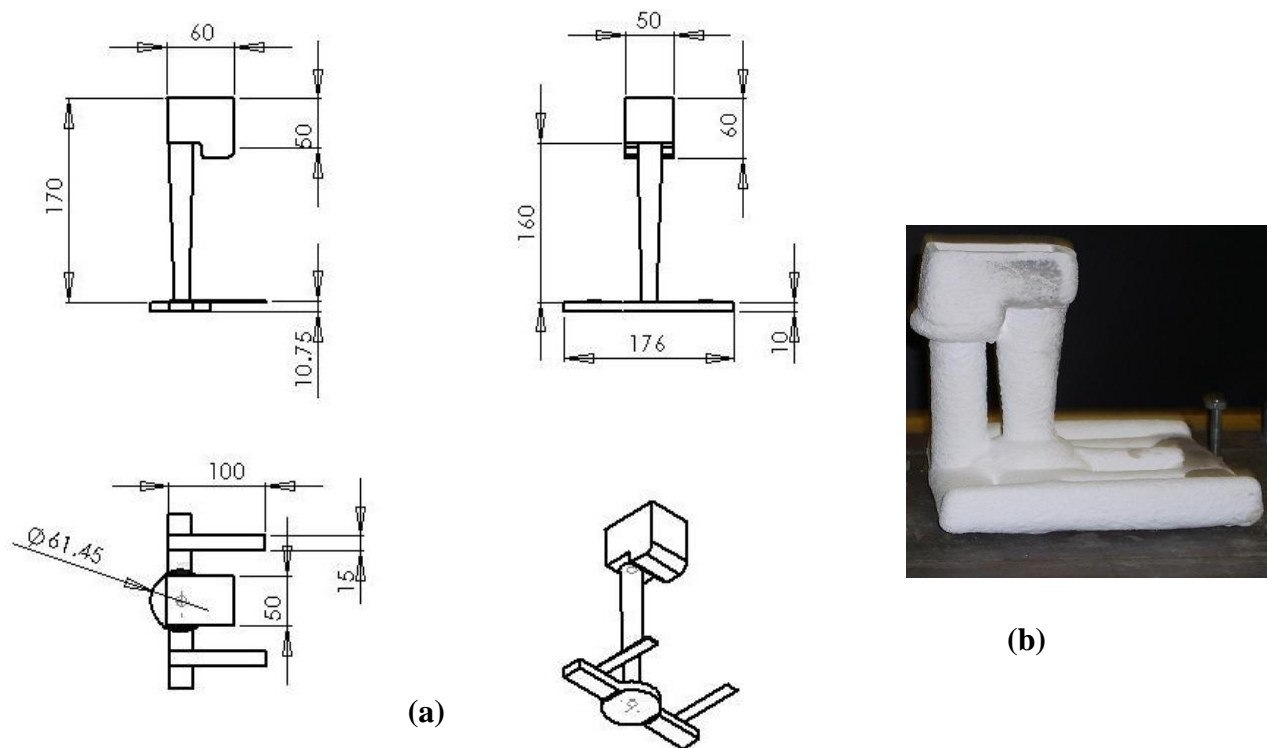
(a) Mould design for fluidity test strip thickness 0.75mm metal height 170mm, pouring temperature 450°C, mould temperature 660°C-700C (b) ceramic mould
